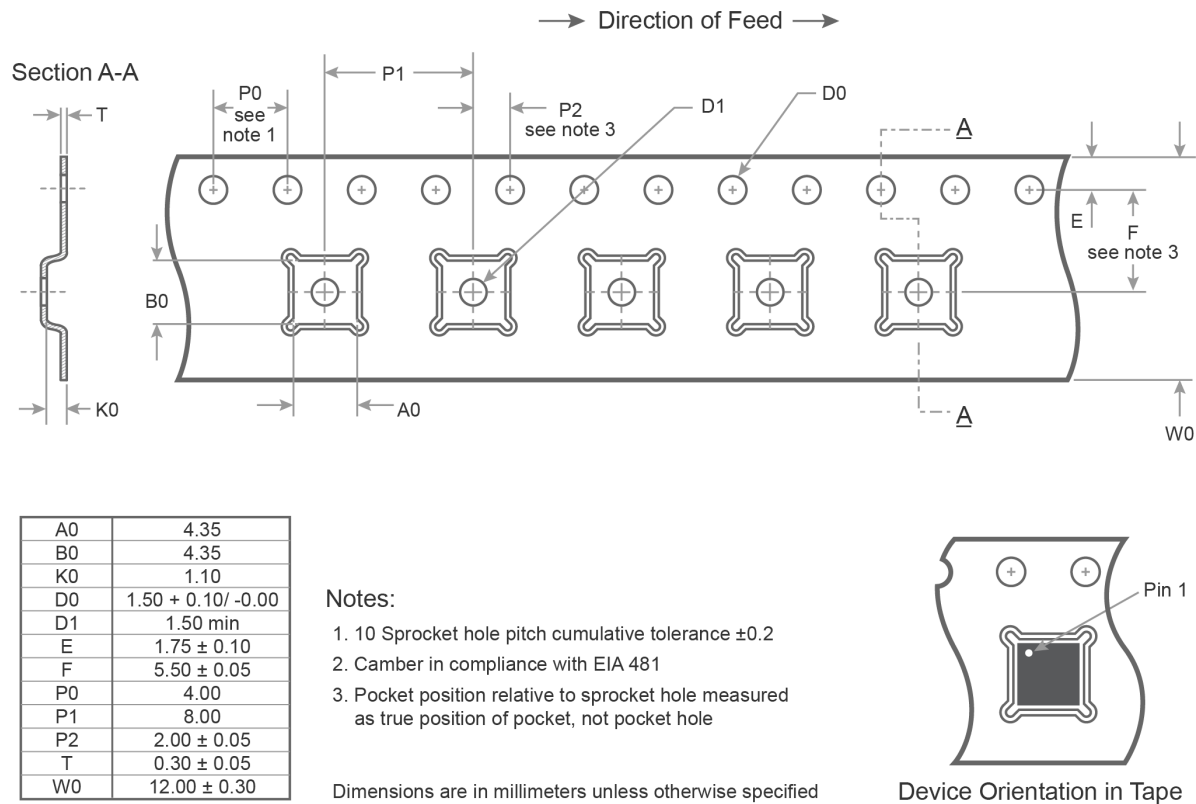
Tape and reel specification for the 24-lead 4 × 4 × 0.85 mm QFN package
